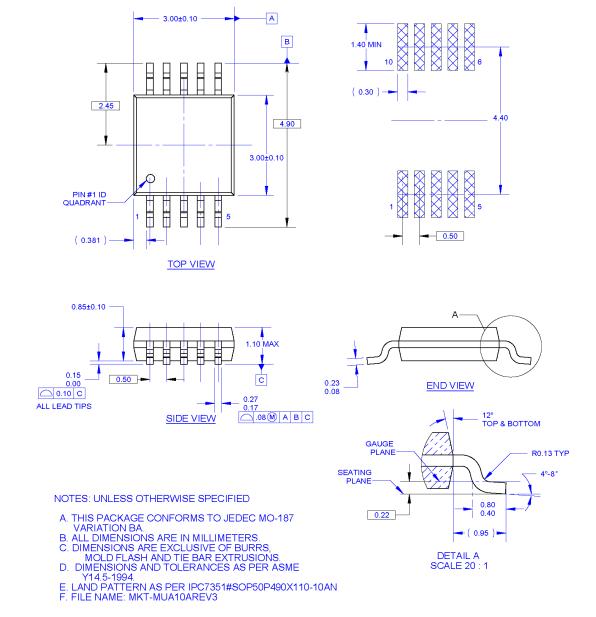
10-Lead Molded Small Outline Package (MSOP)
